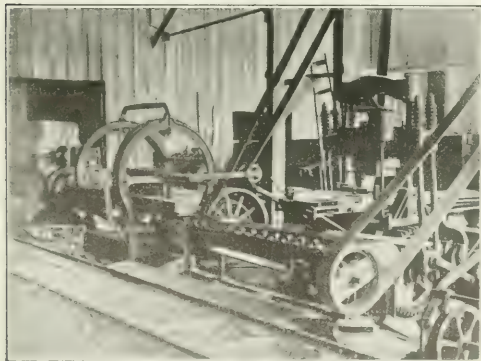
Wire-Cut Brick Machine Belted to Line Shaft.
